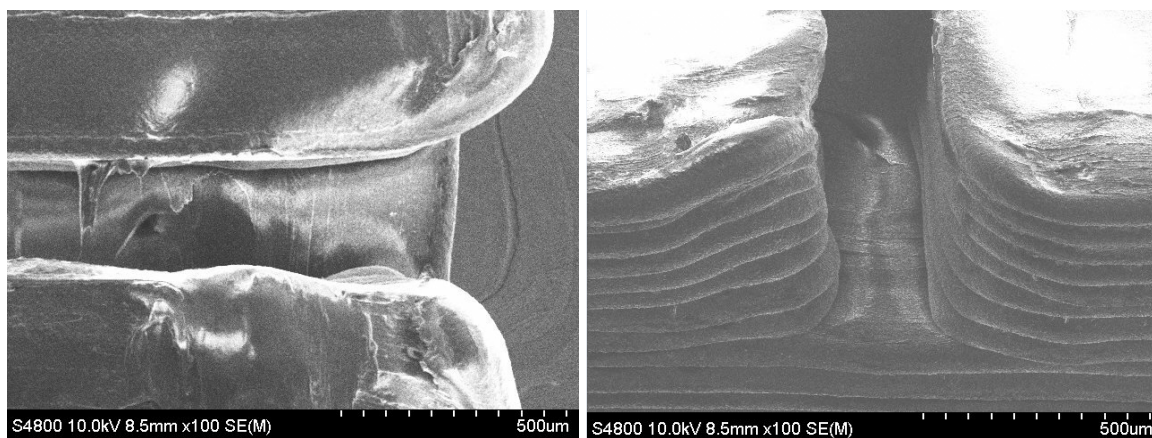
Micrographs taken of the 3D printed diffuser assembly.
